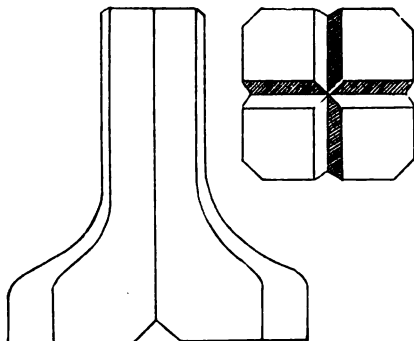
THE SHAPER FORMS THE CUTTING EDGES EVENLY
